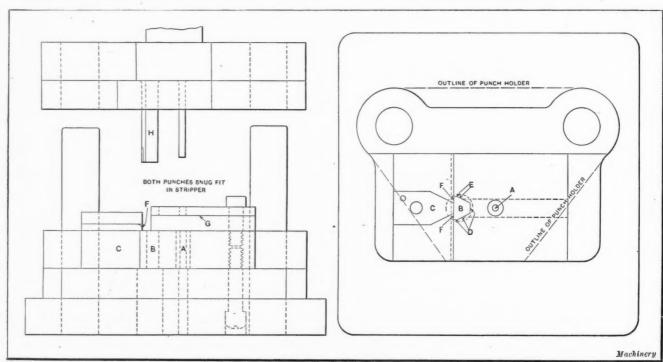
Die for forming Small Steel Piece shown in Fig. 1
